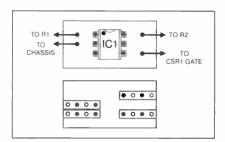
Once the opto-isolator has been mounted, remove all unwanted copper tracks from the piece of stripboard.
